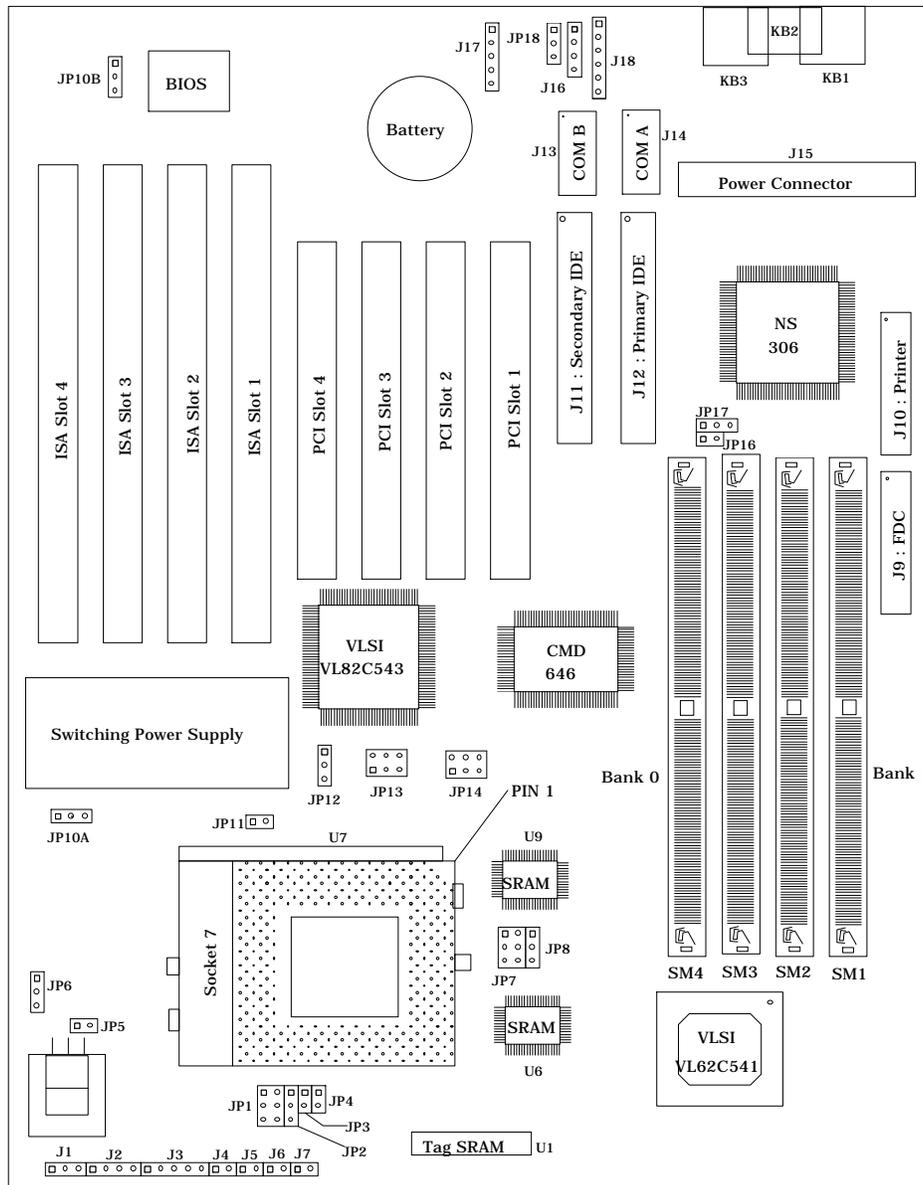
The DFI Screamer Pro Rev. B+ system board layout
